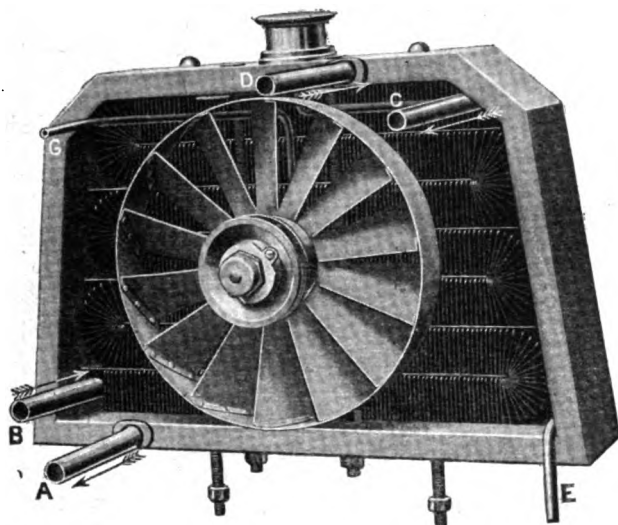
Rear View of Grouvelle-Arquembourg combined Water Tank and Radiator.
